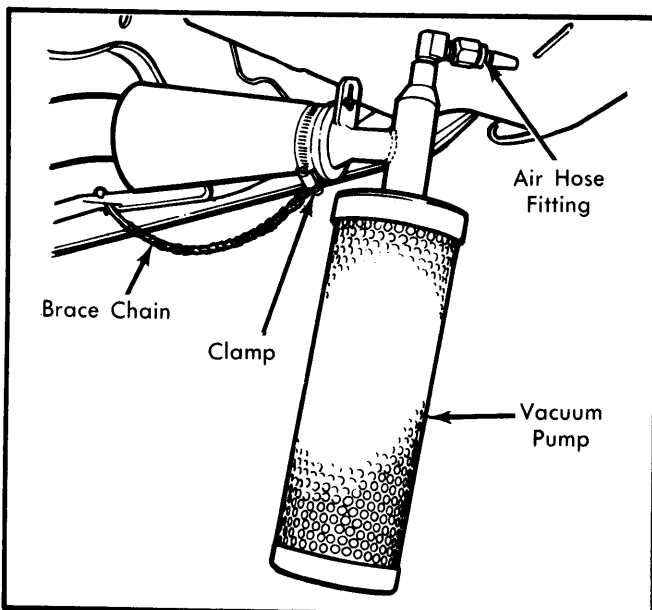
Vacuum Aspirator Installation American Motors and General Motors Vehicles Only
